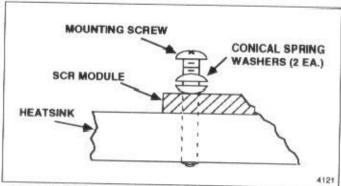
SCR module assembly mounting details. Be sure to install the two conical spring washers in series beneath mounting screw head as shown.
